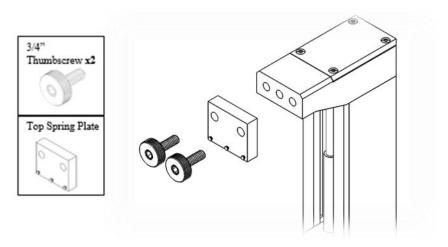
attachment of Spring Plate to the Load Cell and Top Mount
